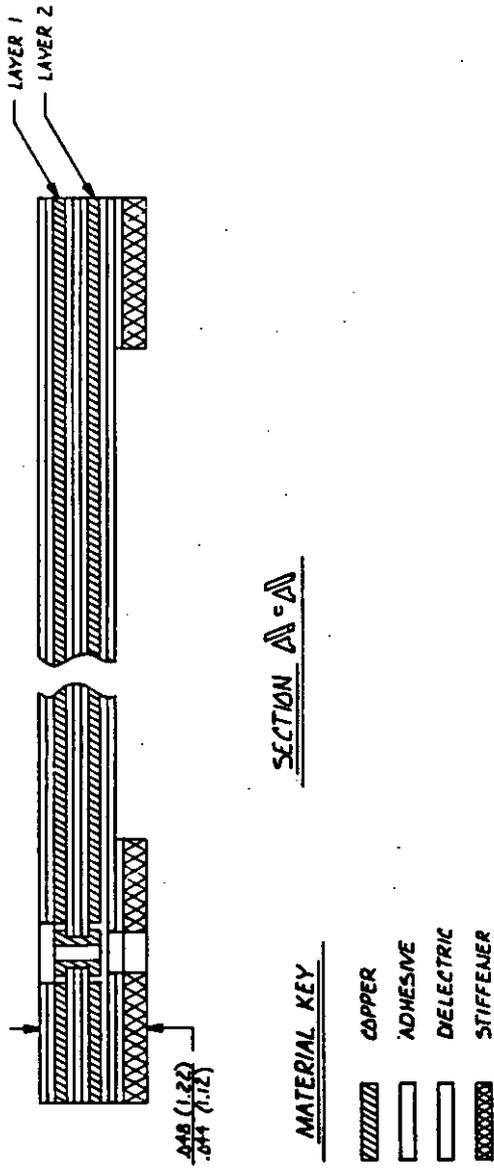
Double sided test specimen IPC-A-28 - Continued.
